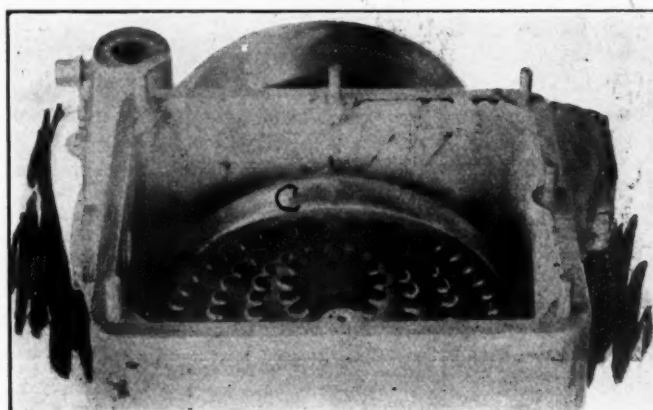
Front view of the driven member, showing the four internal tooth rings which mesh with the driving pinion
